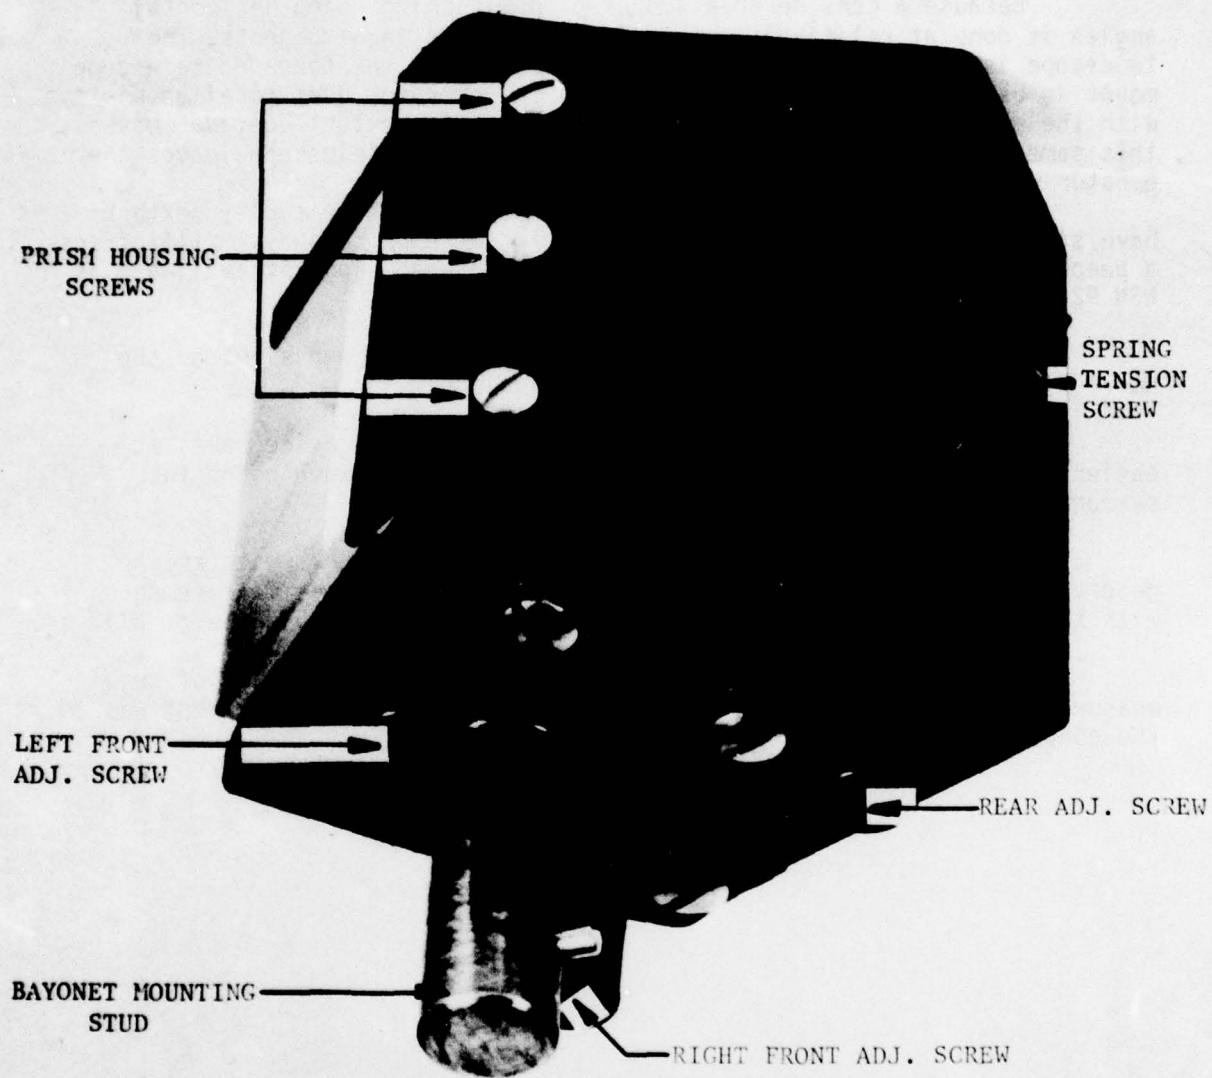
OBLIQUE VIEW OF PENTA PRISM SHOWING ADJUSTMENT SCREWS
